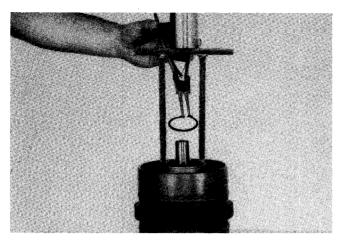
Compress piston return spring. Remove return spring retainer ring.
